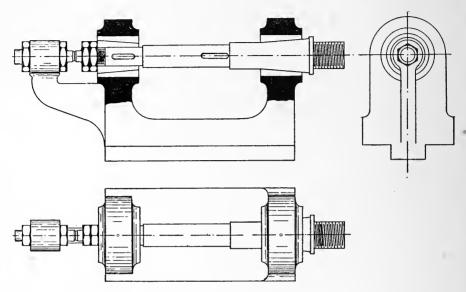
Vertical Section through Bearings of  $4\frac{1}{2}$ -Inch Centre Lathe.
